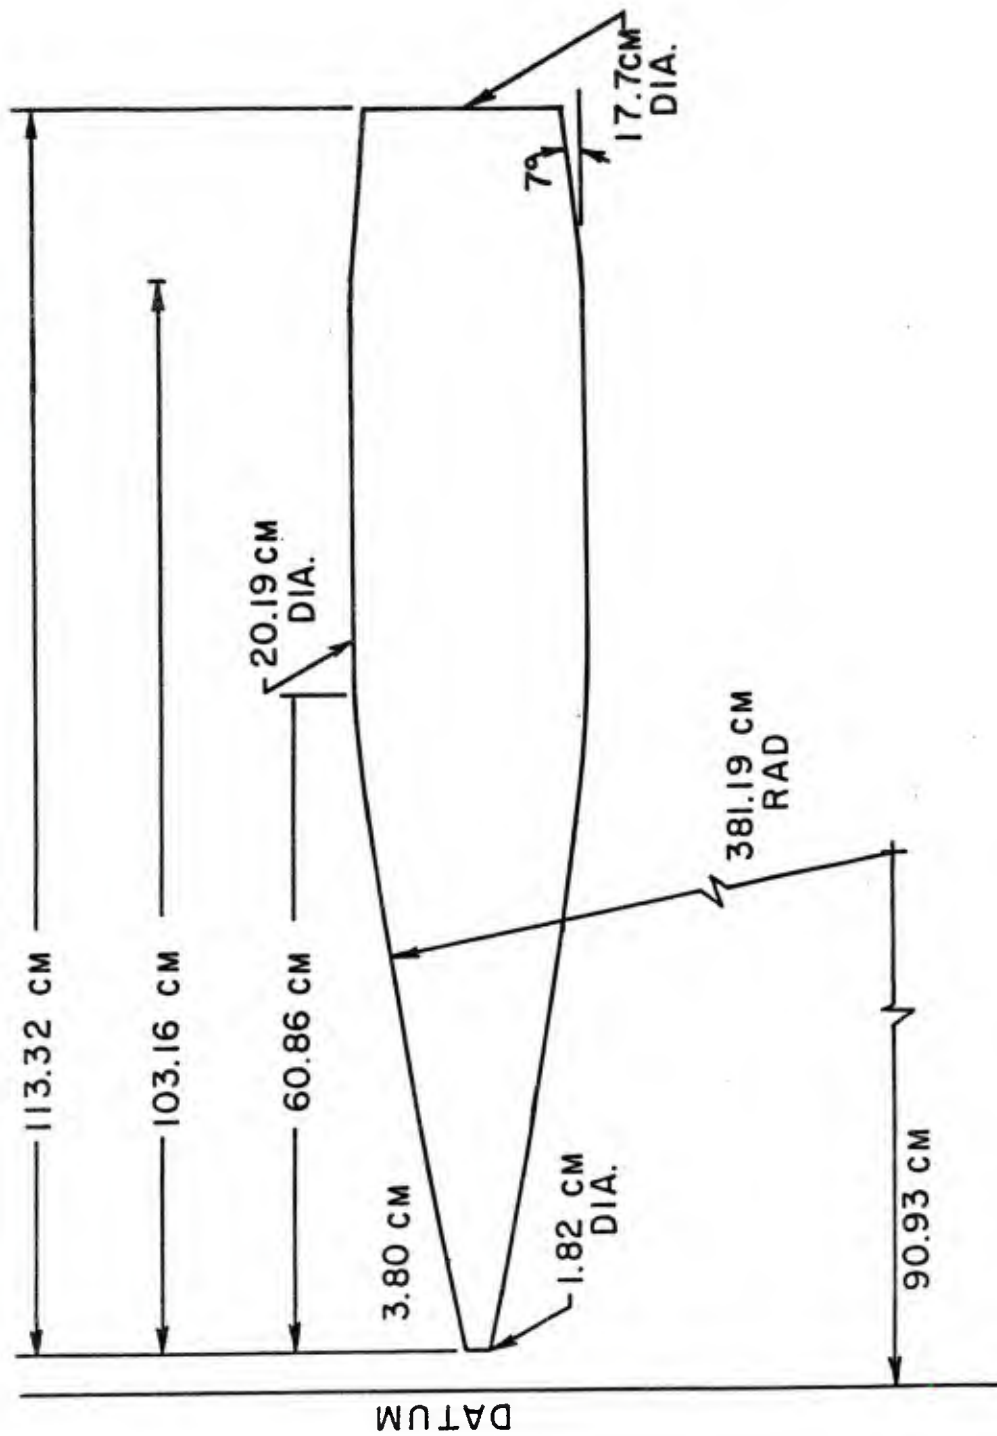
Conical Boattail Model Configuration Showing Dimensions
